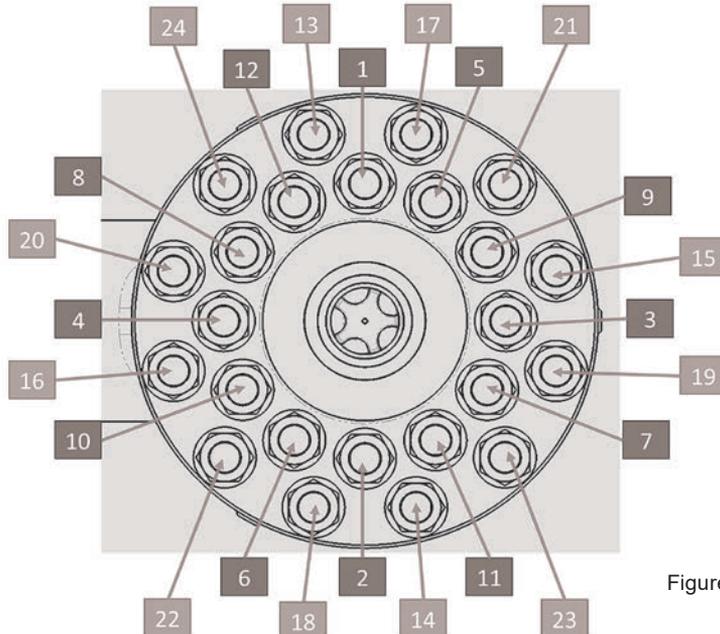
Torque Sequence Single Bolting Circle 24 Bolts
